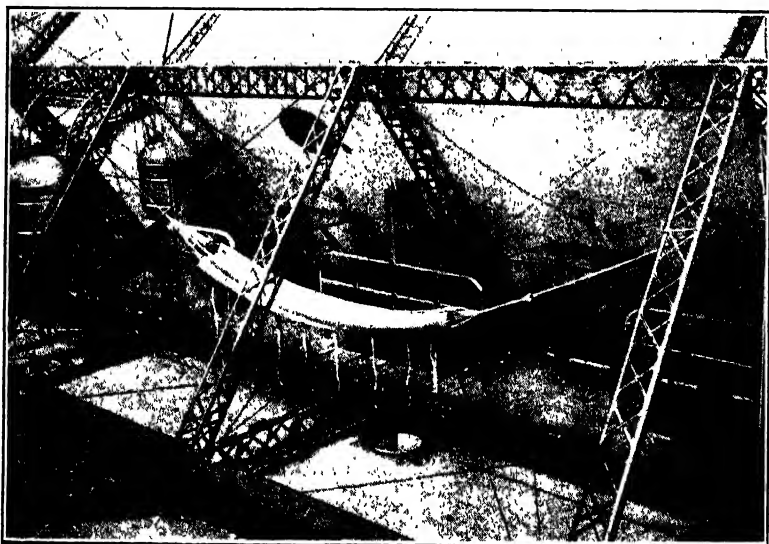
Crew's Quarters on Bodensee, a German Zeppelin. Note Construction of Duralumin Girders Built Up of Numerous Small Pieces.
